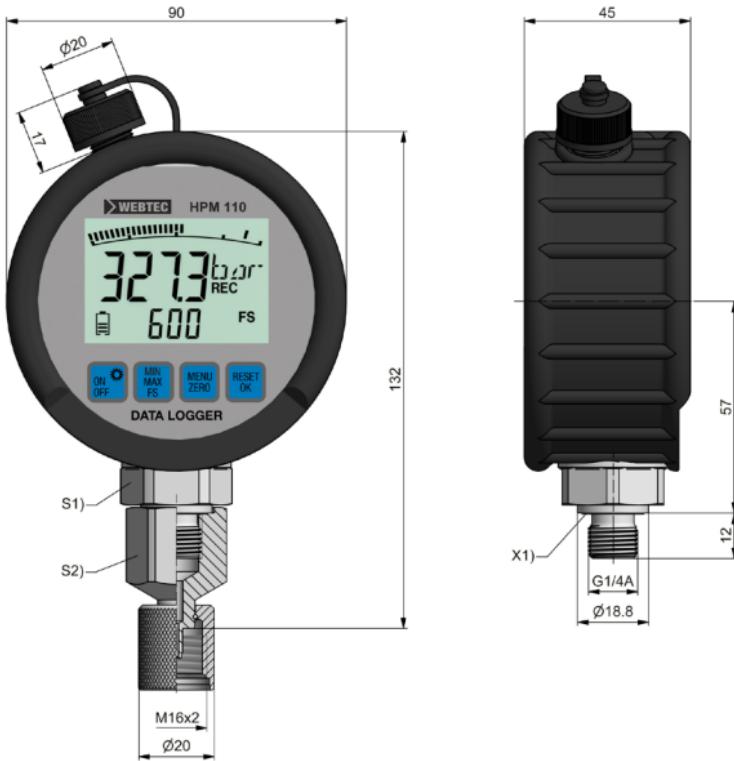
Dimensional drawing SR-HPM-110-DL-MT (data logger)
